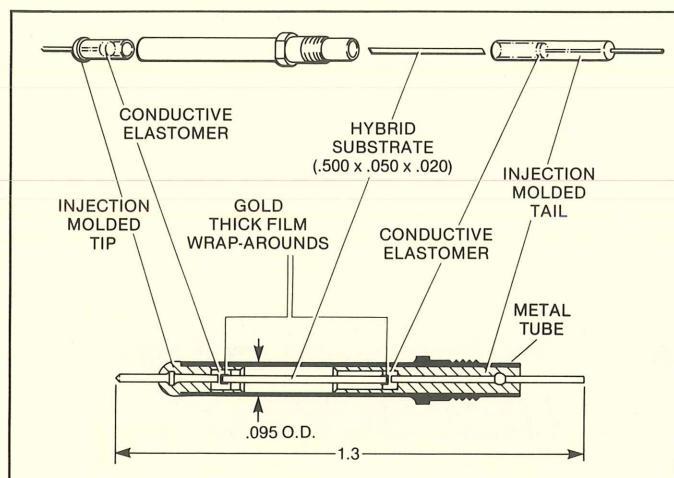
An exploded view of microprobe components. Parts are slipped in from each end and held in place by crimping the metal tube.
